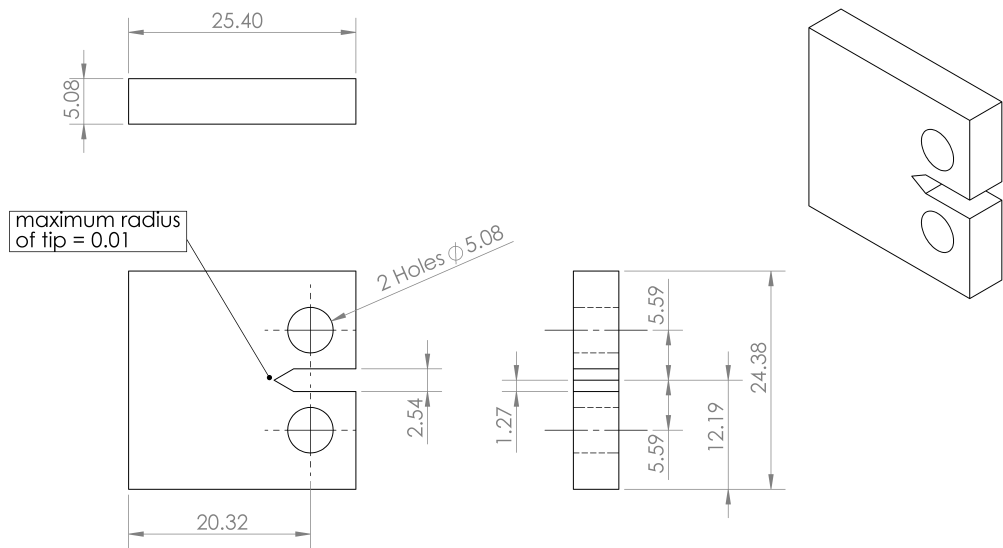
Compact tension (CT) specimen geometry used in crack detection. All dimensions are in mm. Based on designs from ASTM E647 [58].
